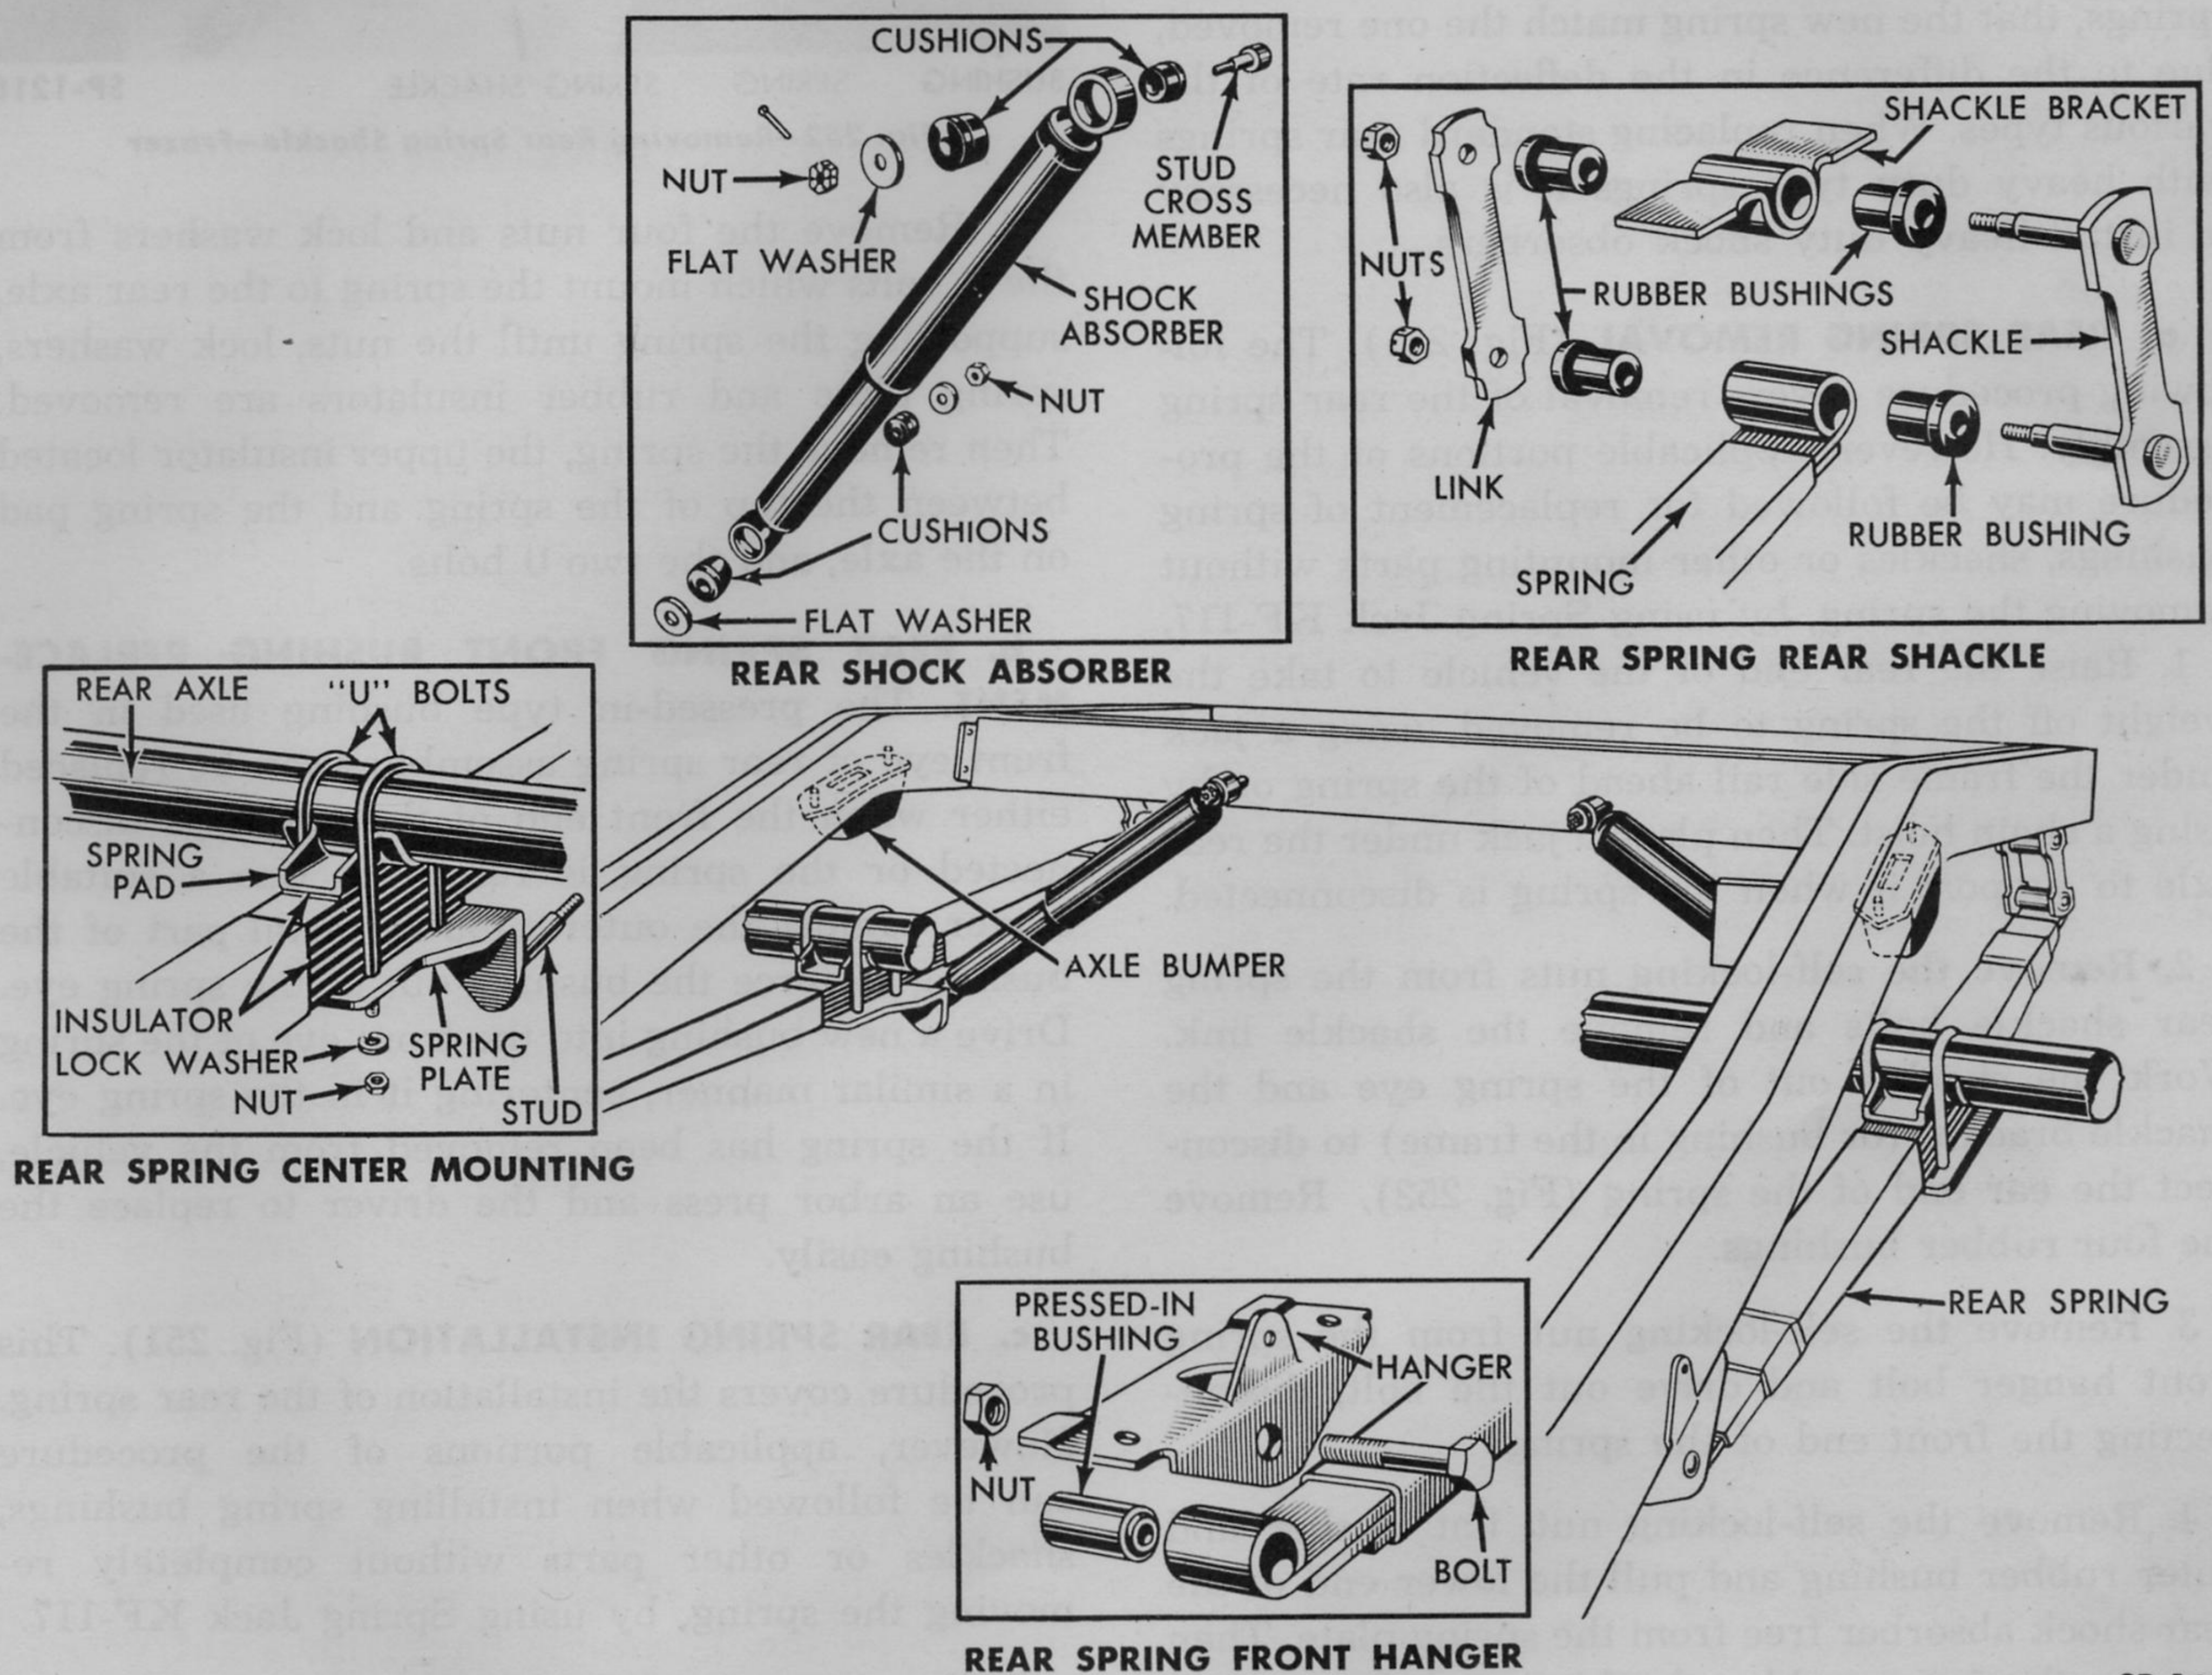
Rear Spring and Shock Absorber Installation—Exploded View
